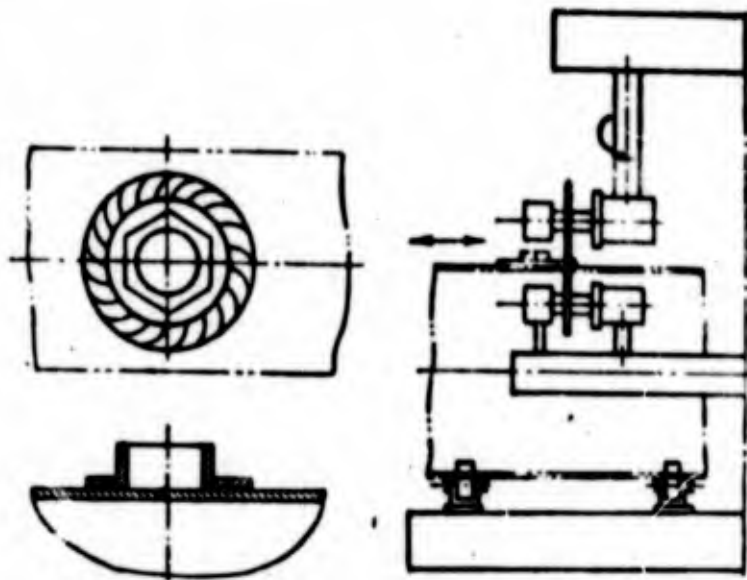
Step-roller welding of fittings to shells.
